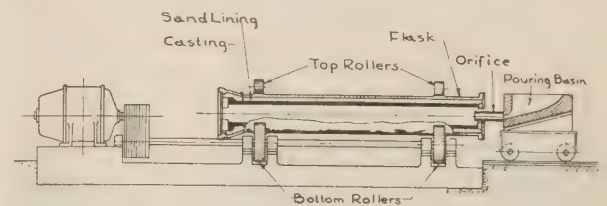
TRUE CENTRIFUGAL MACHINE FOR LONG CASTINGS
